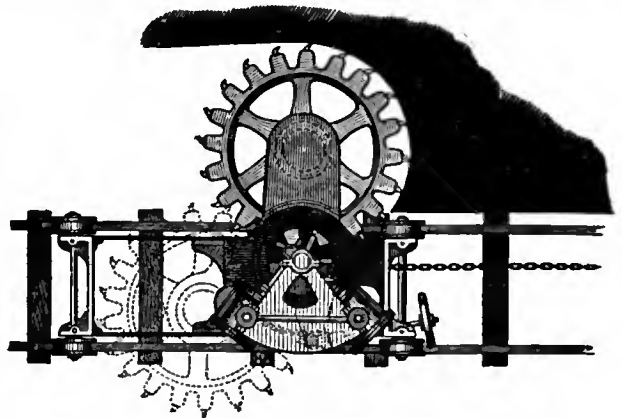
Winstanly & Barker's Coal-cutting Machine—Plan.
